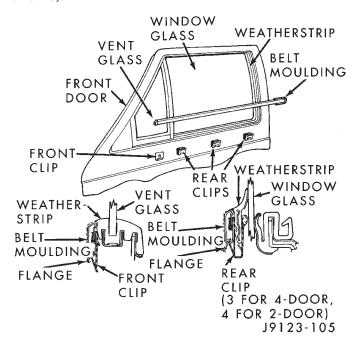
Front Door Beltline Moulding and Weatherstrip Seals
